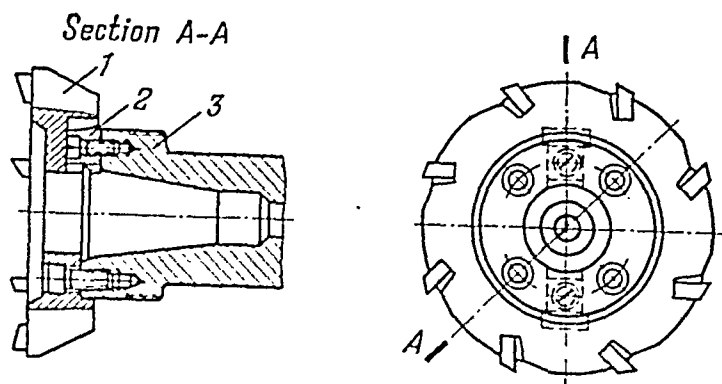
Holding a face milling cutter on the spindle of a milling machine:
